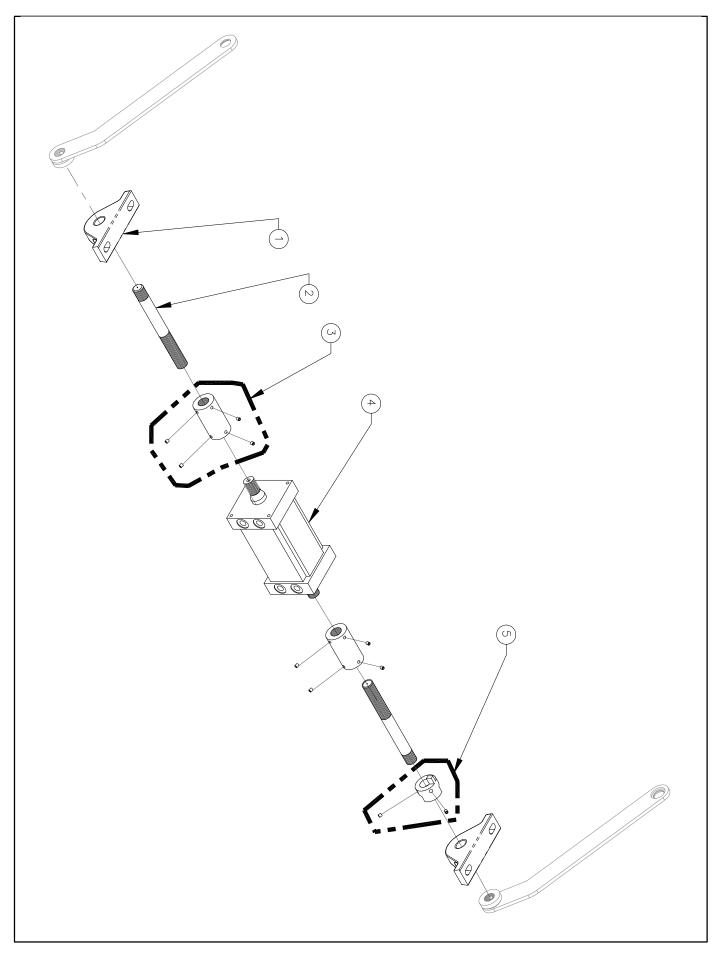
ROTARY ACTUATOR ASSEMBLY
